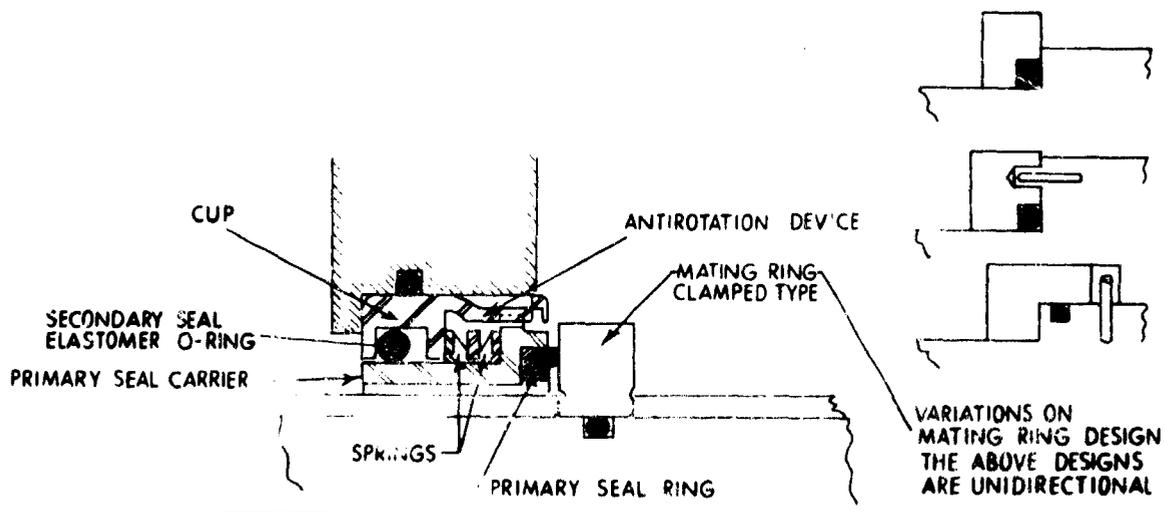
Cup- or Package-Type Mechanical Face Seal, Stationary Mounted
